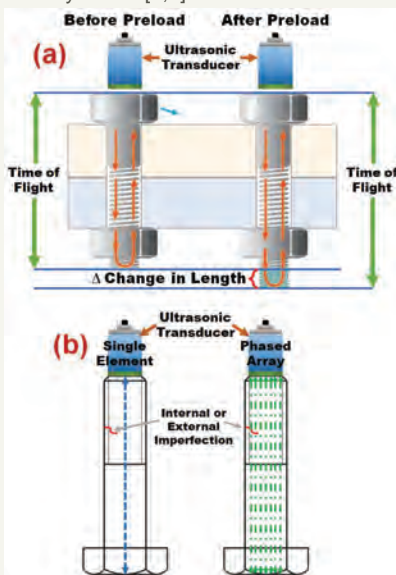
(a) SCHEMATIC OF BOLTS UNDER INSPECTION BY ULTRASONIC TRANSDUCER; (b) BOLTS UNDER INSPECTION BY SINGLE ELEMENT (LEFT) AND PHASED ARRAY (RIGHT) PROBES
